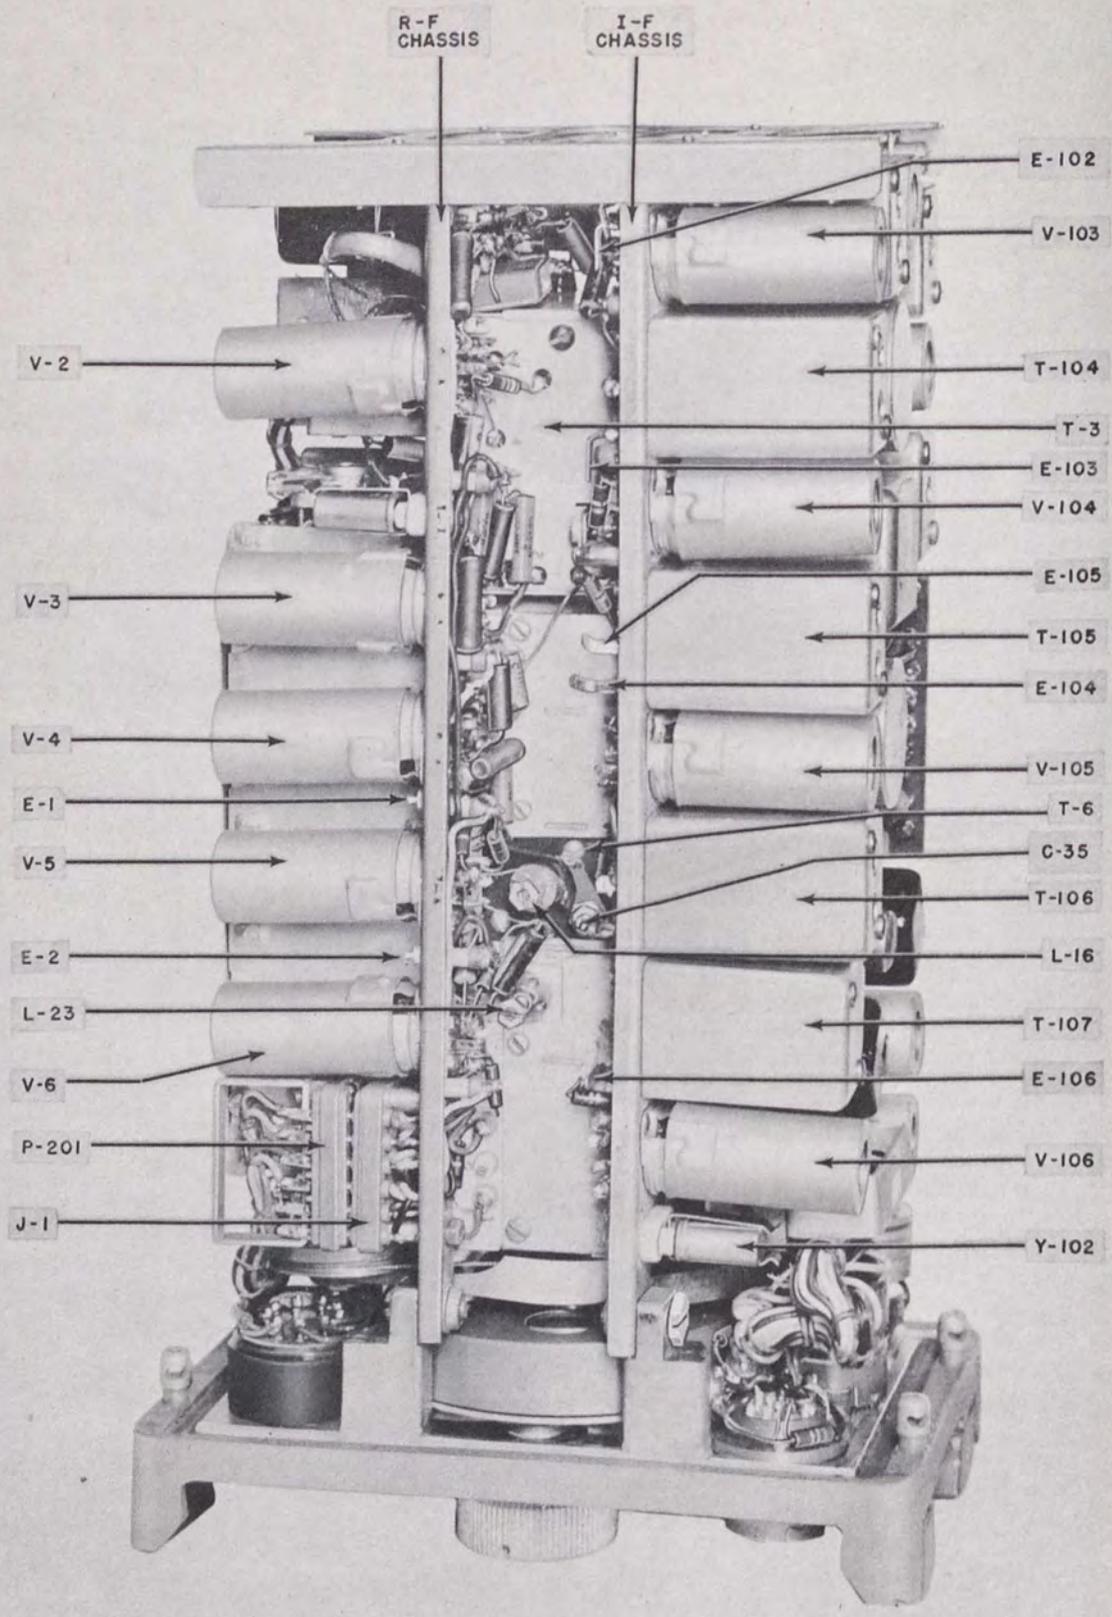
Receiver-Transmitter RT-70/GRC, case removed, view of i-f chassis (left side of panel-and-chassis assembly).
